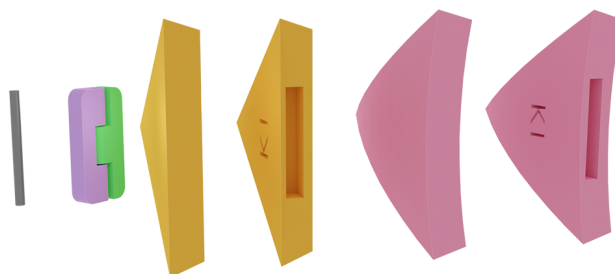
Puzzle parts: A thickened triangle with and without holes and a hinge joint connector.
